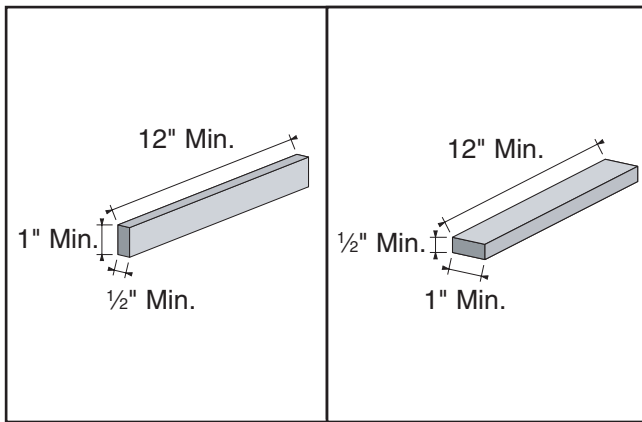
Minimum dimensions for edge jointing and surface planing (jointer).
